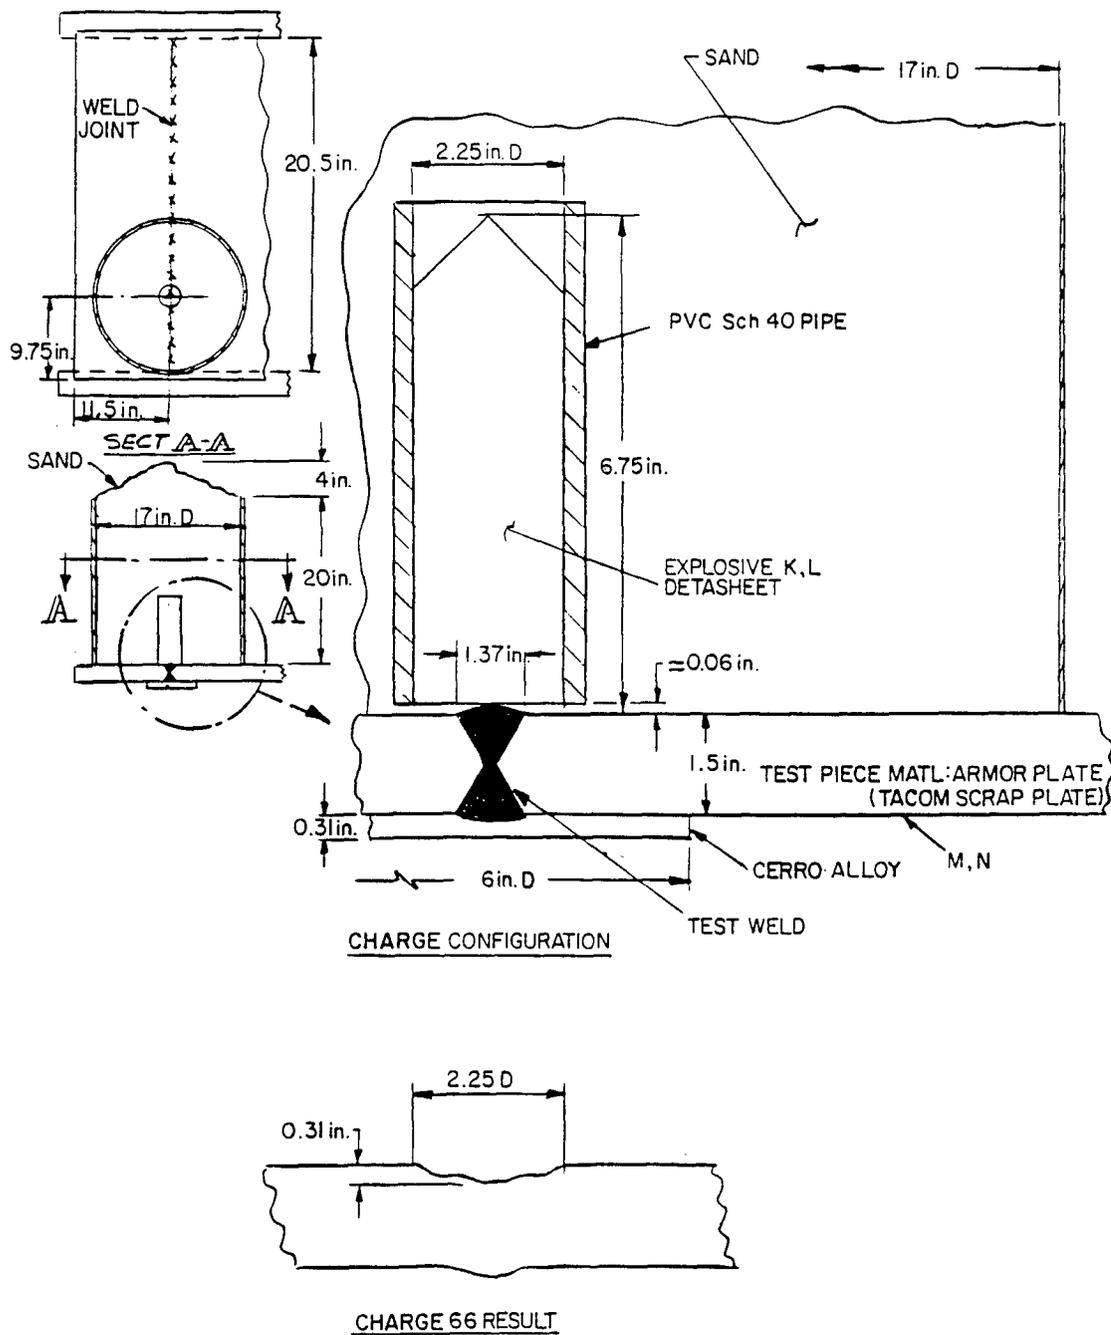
Solid Cylindrical Charge With Sand Containment and Momentum Plate on Armor Plate Weld (Letters in illustrations are keyed to columns in Table 5-2.)
